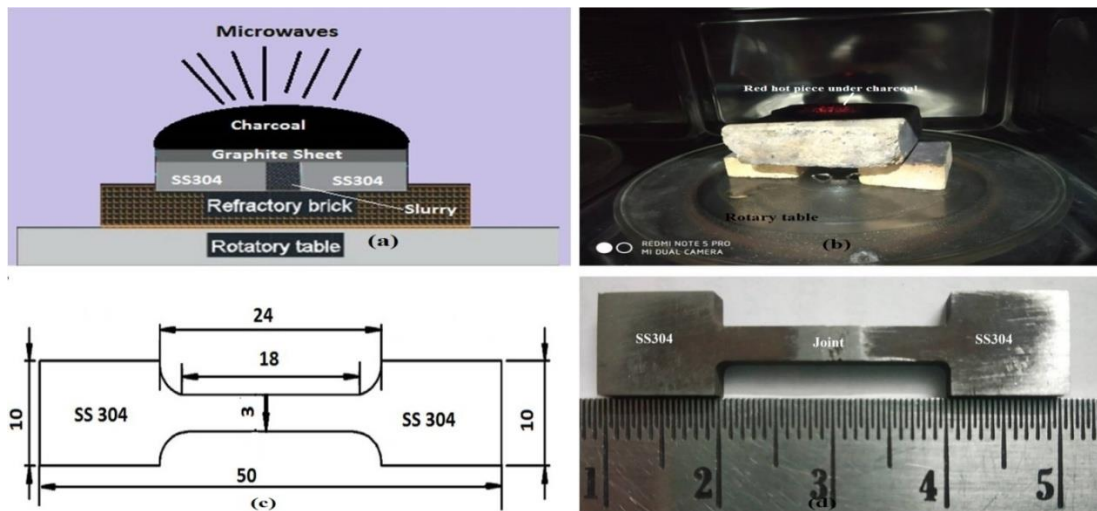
showing, a) setup for microwave hybrid heating, b) setup inside microwave, c) welded piece cutting as per ASTM, d) joint piece for tensile testing
